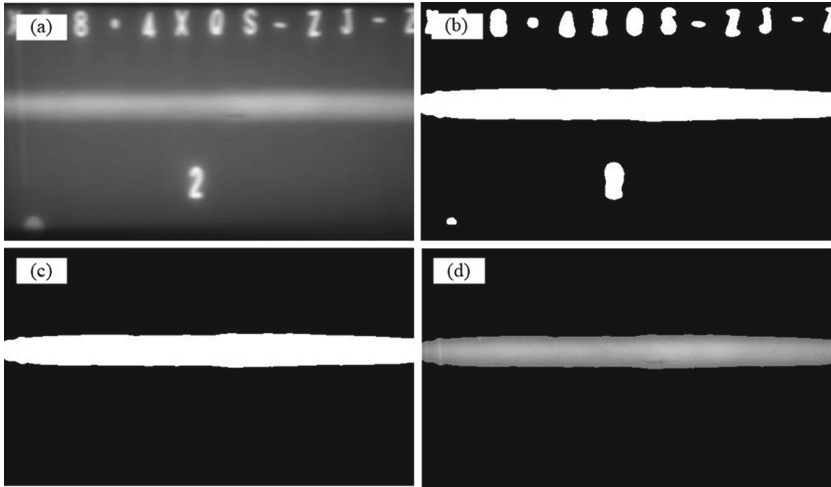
The process of weld bead extraction: (a). image after preprocessing; (b). image after thresholding and morphological operation; (c). mask; (d). final result of weld extraction
